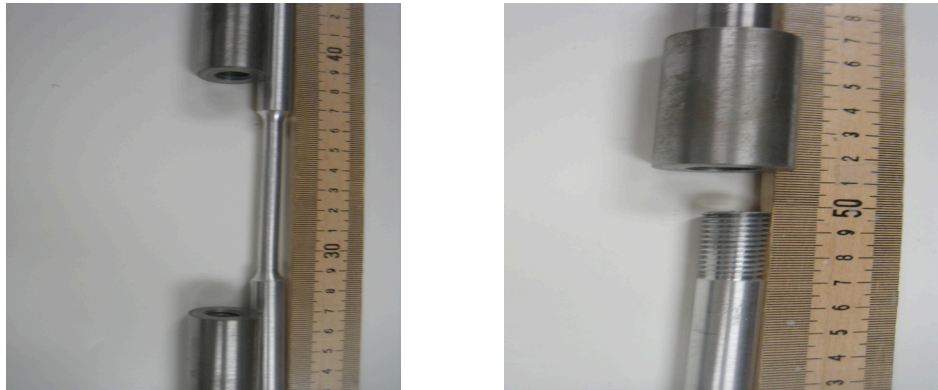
Al-sample with two threaded holders (left), in top or bottom view (right).
